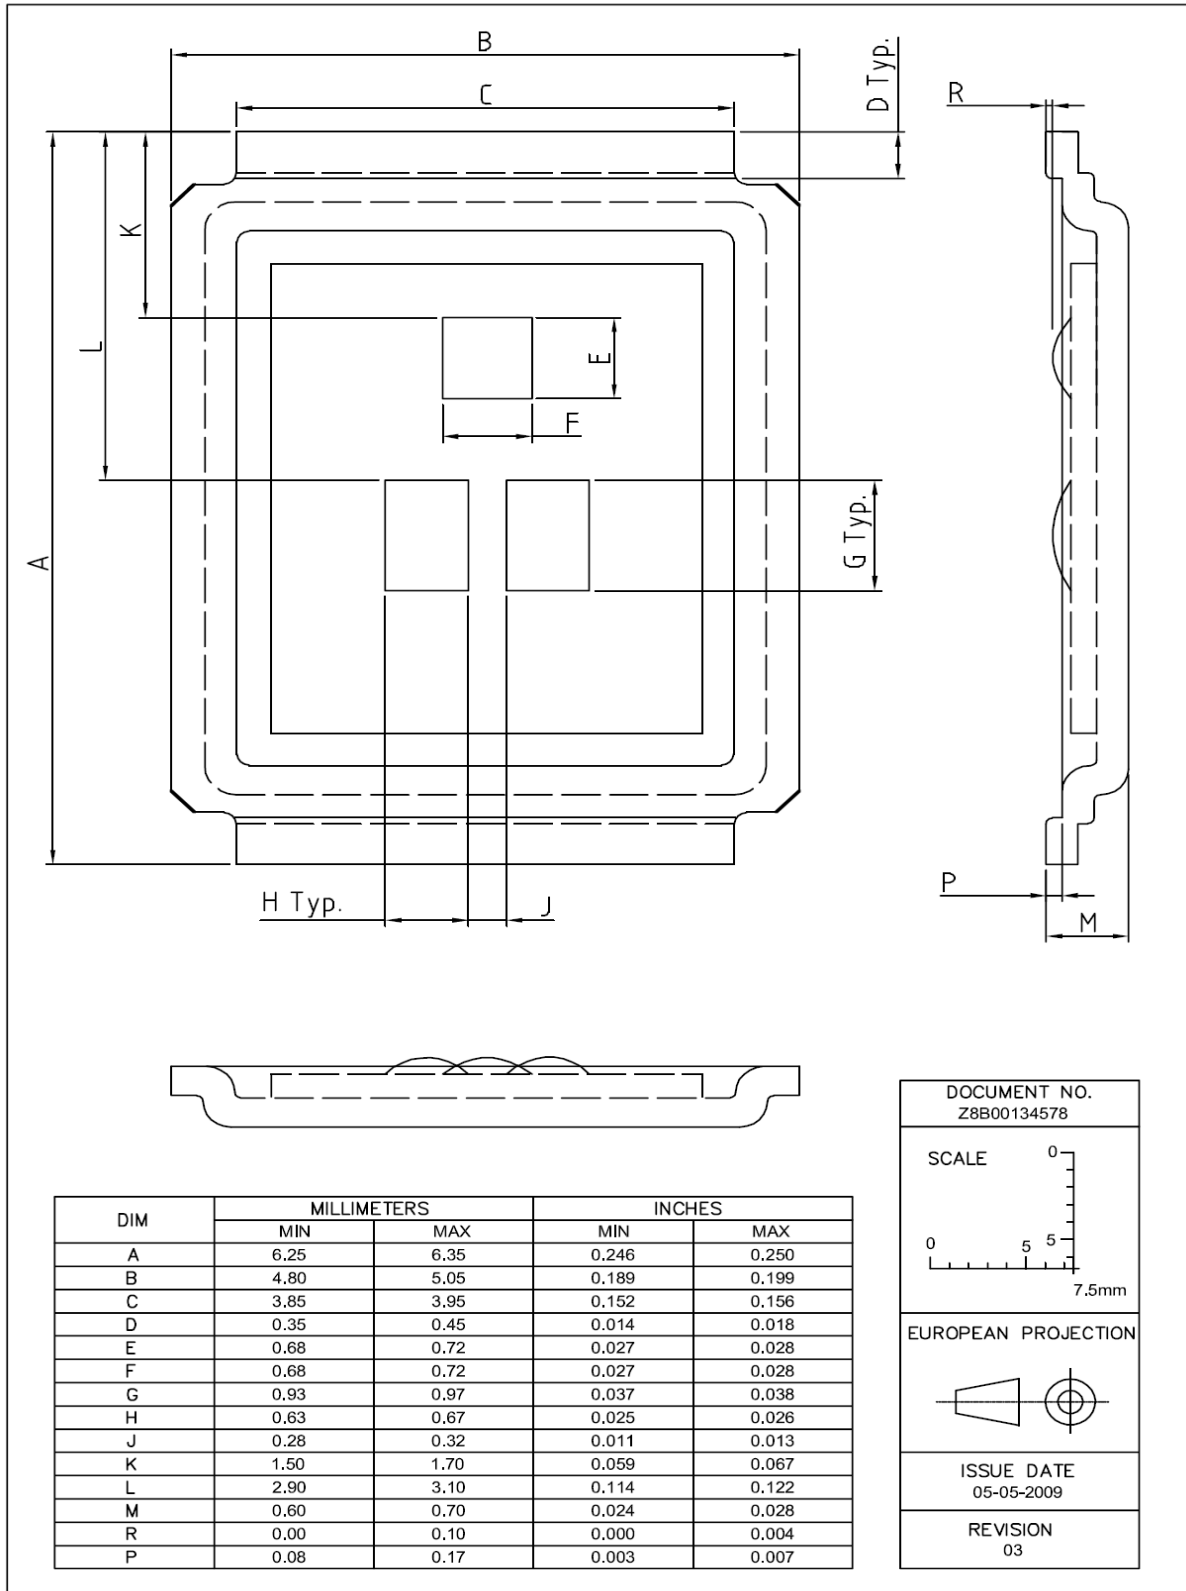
Outlines MG-WDSO-2, dimensions in mm/inches
